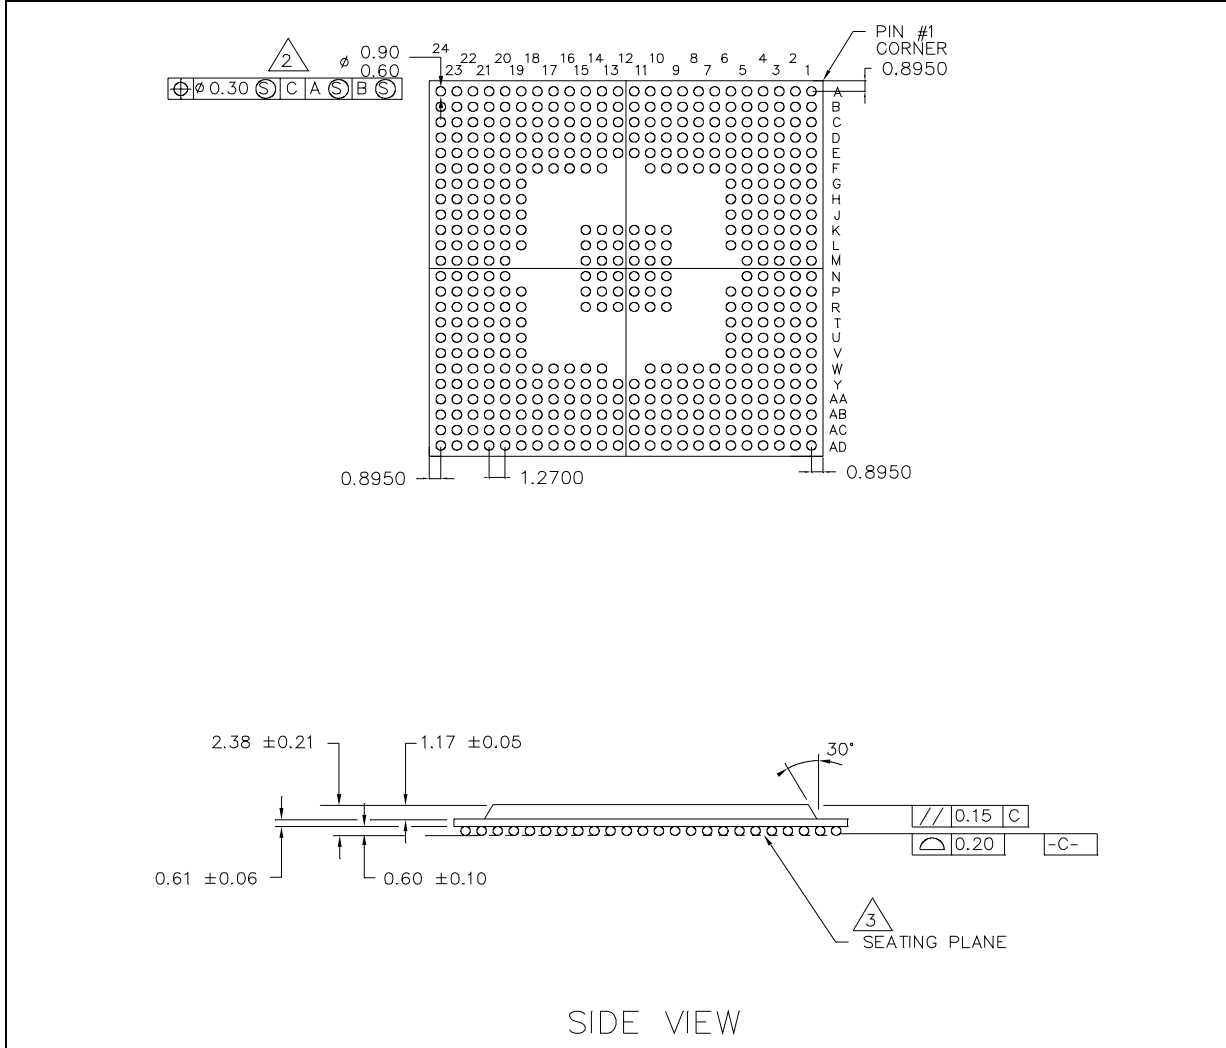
460-Pin PBGA Package (Top and Bottom View)
